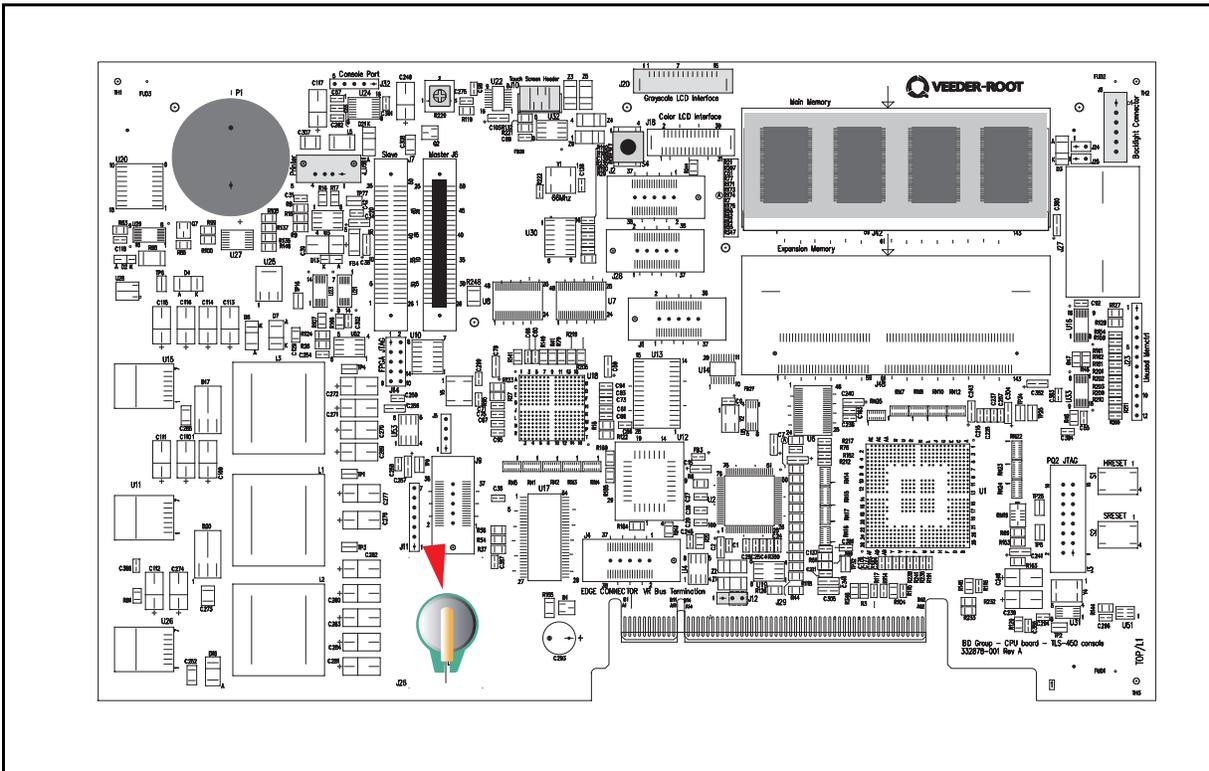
Locating TLS-450 CPU Board Reusable iButton
